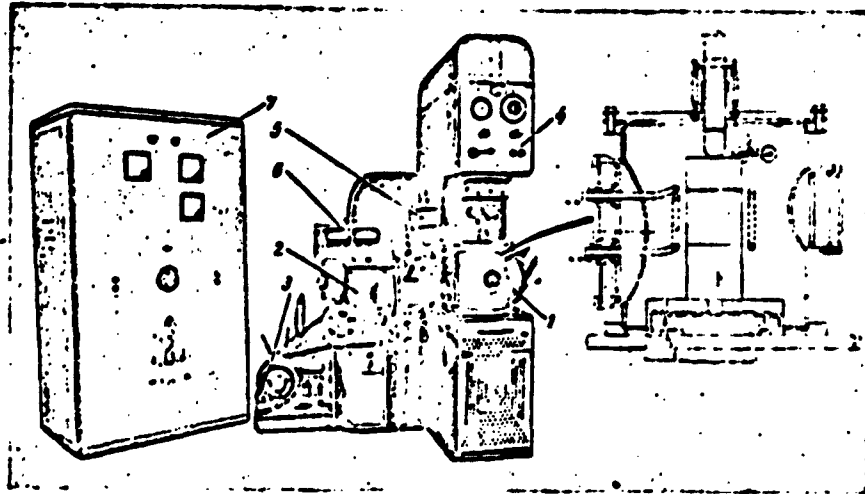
Apparatus for diffusion welding of large parts. 1) Vacuum chamber with volume of 30 dm³; 2) type VA-0.5-1 high-vacuum unit; 3) type VN-1 mechanical pump; 4) motor-operated 10-ton hydraulic press; 5) type MPShchPr-54 millivoltmeter for measuring temperatures to 1100°; 6) type VIT-1 vacuum gauge; 7) 20-kv high-frequency generator.
